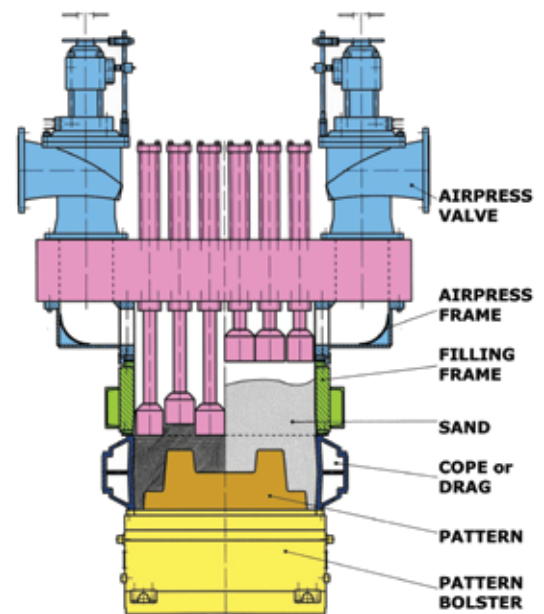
AIRPRESS plus 2000 mould compaction technology – schematic view of machine arrangement
